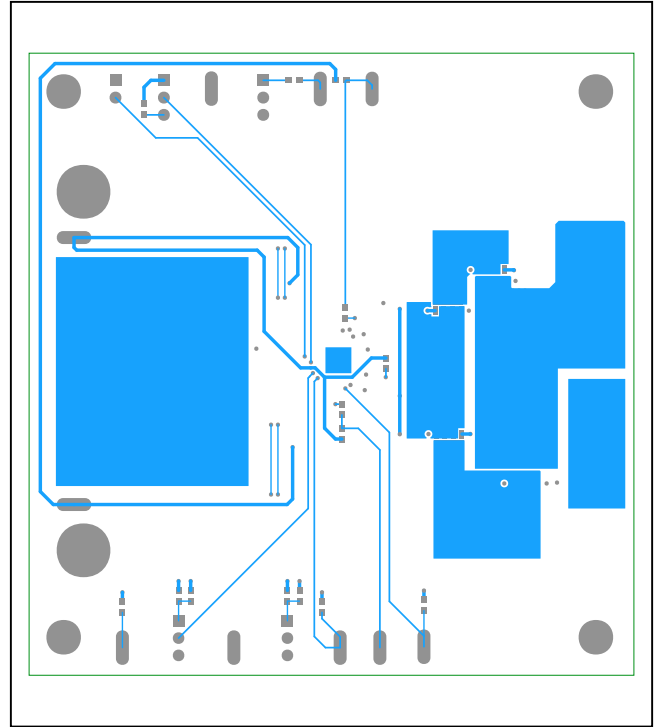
MAX17558 EV Kit PCB Layout—Component Bottom Side
